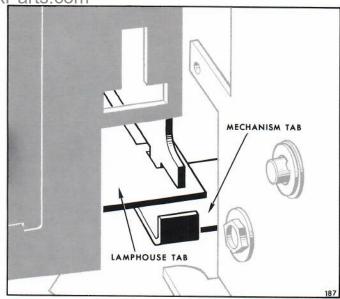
REASSEMBLY OF LAMPHOUSE AND MECHANISM ASSEMBLY
